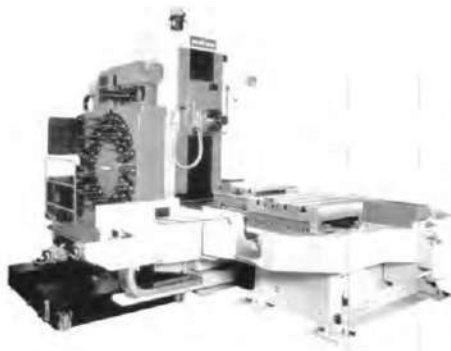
High production horizontal axis CNC machining centre Makino A60 with automatic tool changer and automatic pallet changer (Courtesy, Makino Milling Machines Co. Ltd., Tokyo, Japan)
